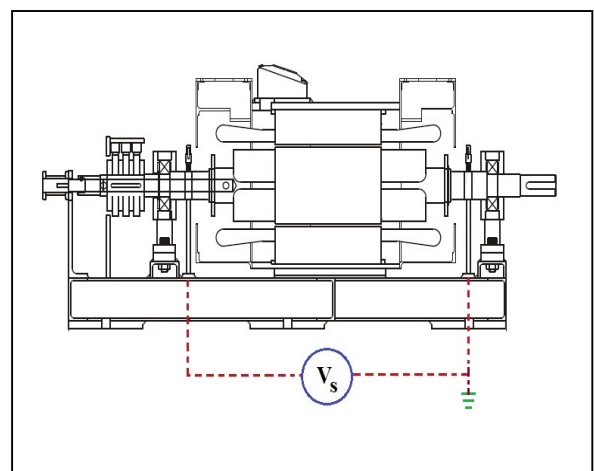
Cross-sectional side view of 2-pole synchronous generator with shaft brushes illustrating the concept for shaft voltage measurement
